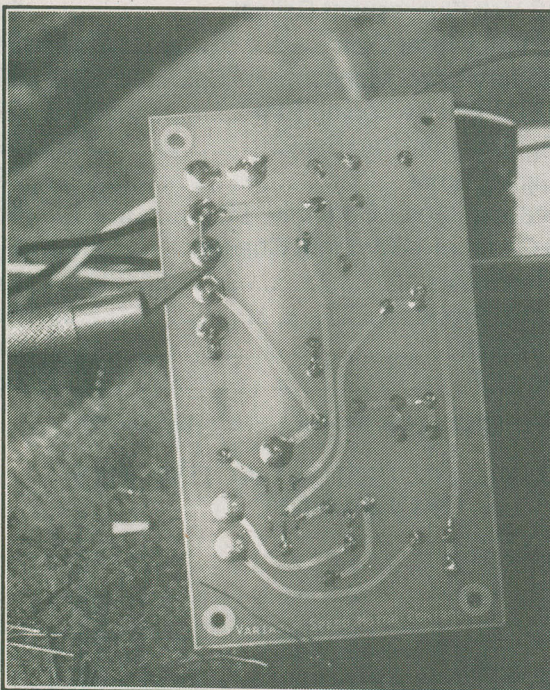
Solder Side of the PC Board with Components Soldered in. (The knife shows the track that was cut. Directly above, a jumper was soldered in.
